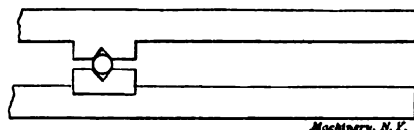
Part of Jig with Pivoted Leaf, Showing Method of Holding Round Work.
